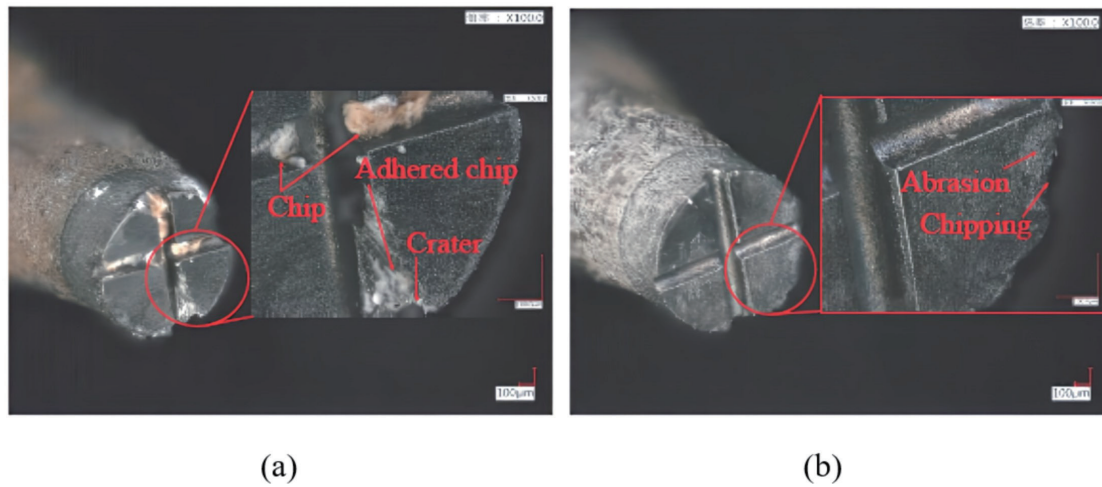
(Color online) Microscopic images of two worn BD-PCD grinding tools: (a) tool B and (b) tool C both with cross-shaped cutting edge.
